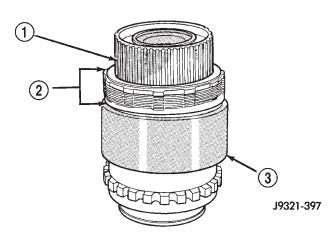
Direct Clutch Pack And Clutch Hub Installation
